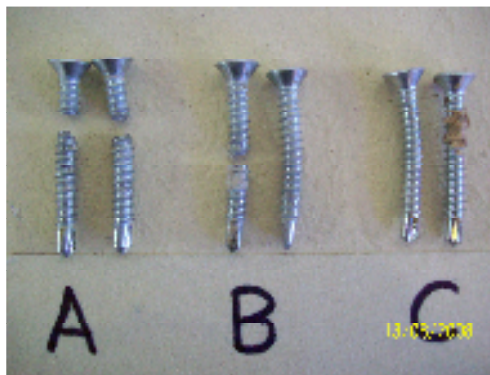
Sample Failure of Specimens – Spalling of Cemboard Dry Board (B)
